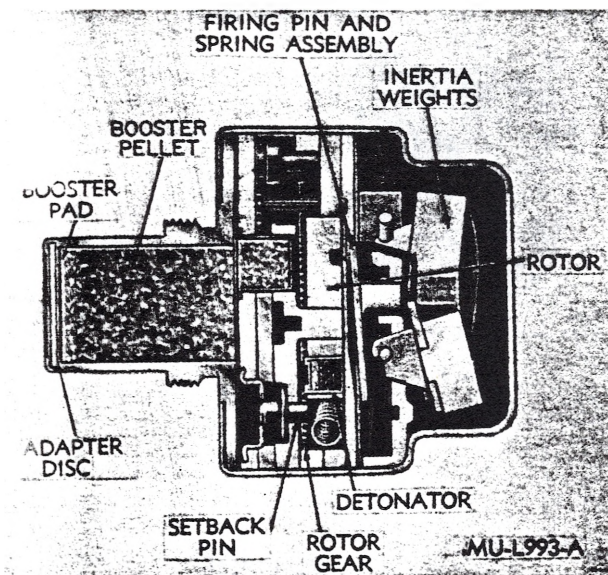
PD Fuze M551, Cutaway View Showing Unarmed Condition
